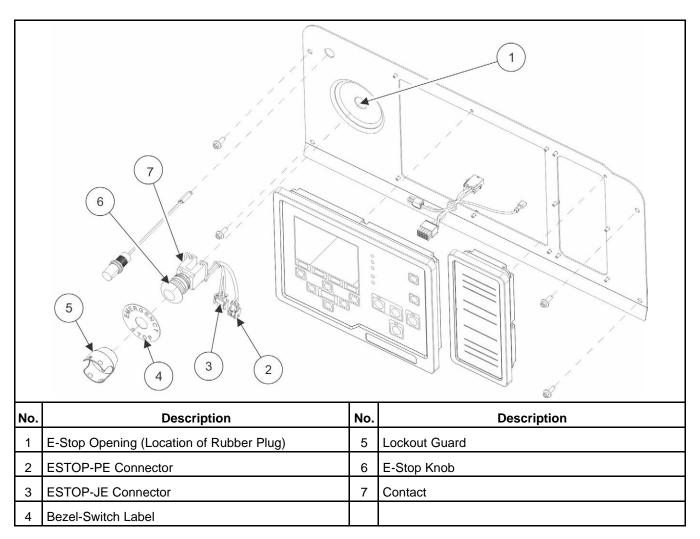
EMERGENCY STOP SWITCH ASSEMBLY (GENERATOR SETS WITH A DISPLAY PANEL RUBBER PLUG ONLY)
